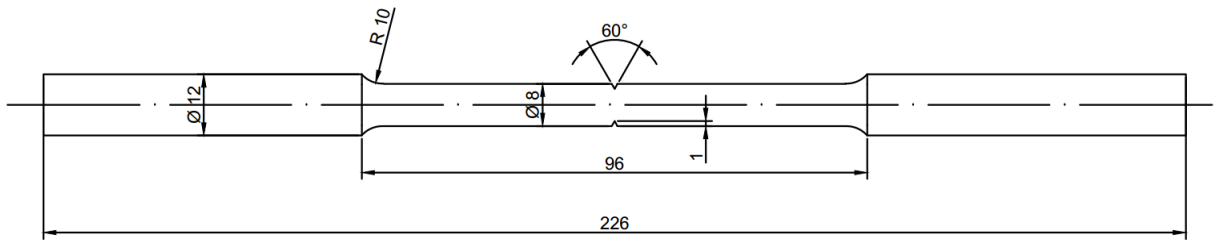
Technical drawing of round bar test specimen for CCRB test method
